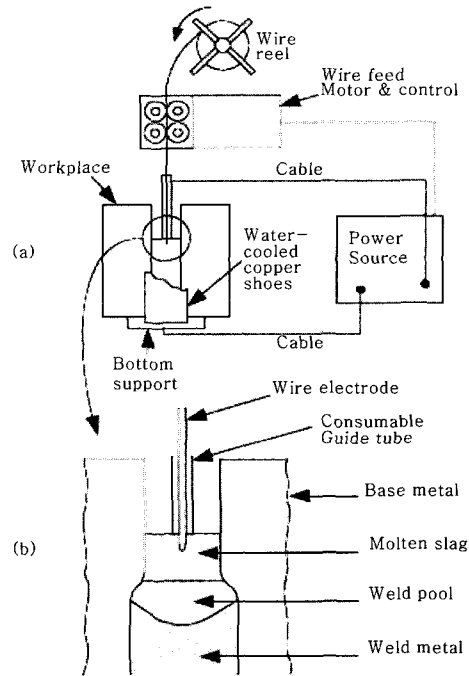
Scheme of Electroslag Welding (a)overall process (b)welding area enlarged
